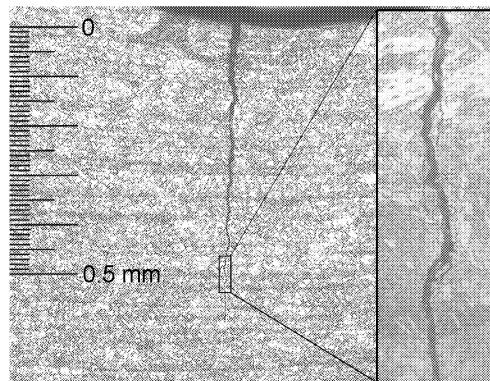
Cross-section at bottom of thread in specimen followed in Figure 6-16. Cracks were found in all thread roots. Typical crack lengths were 0.3 – 0.5 mm.
